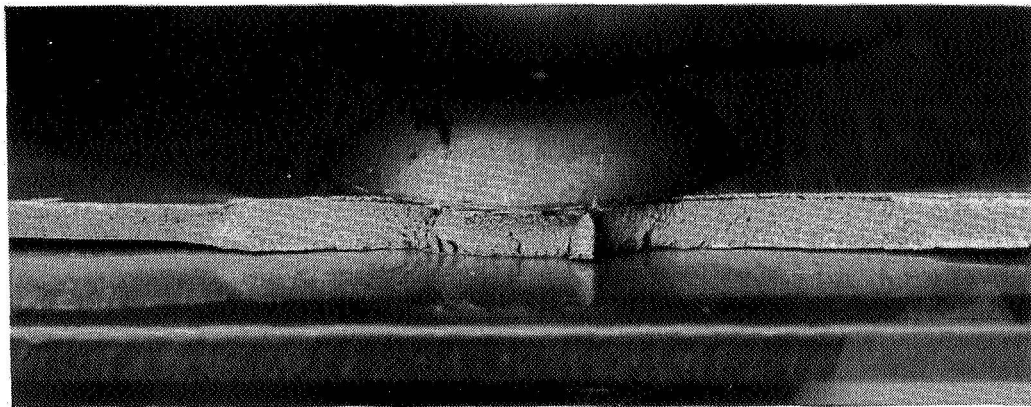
Cracks started ahead of the rivet. Crack path no longer through the hole (good clamping).
